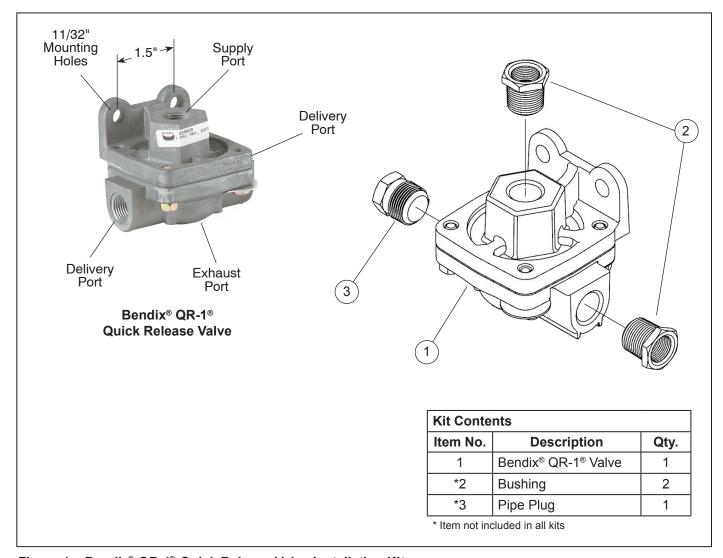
Bendix® QR-1® Quick Release Valve Installation Kit
